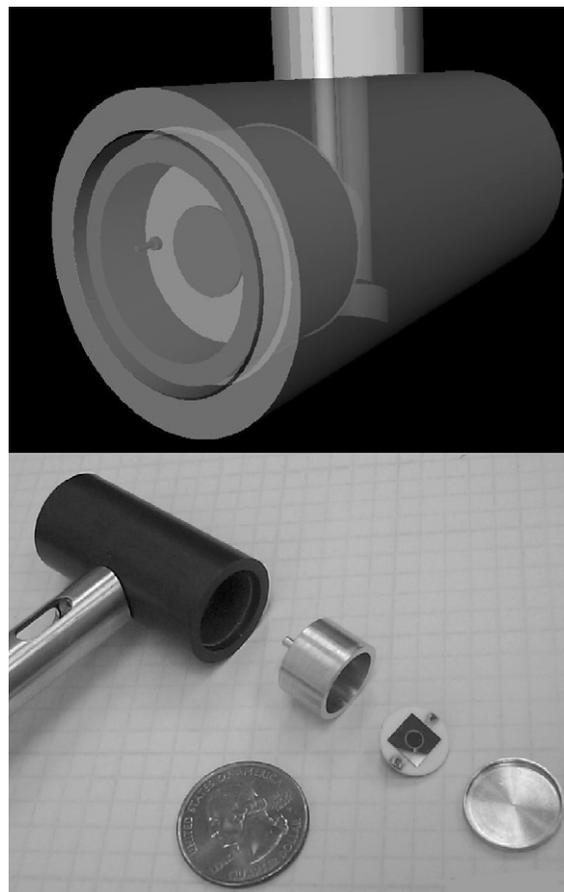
Top-translucent 3-D rendering of detector assembly bottom-photograph of detector assembly.
